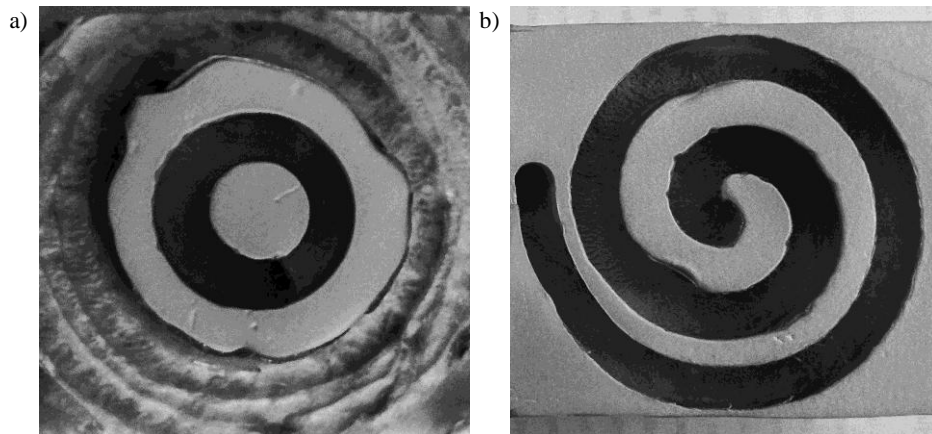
Shapes created on Polyurethane samples: cylinders (a) and spiral (b). The quality of the machined piece is coarse.
